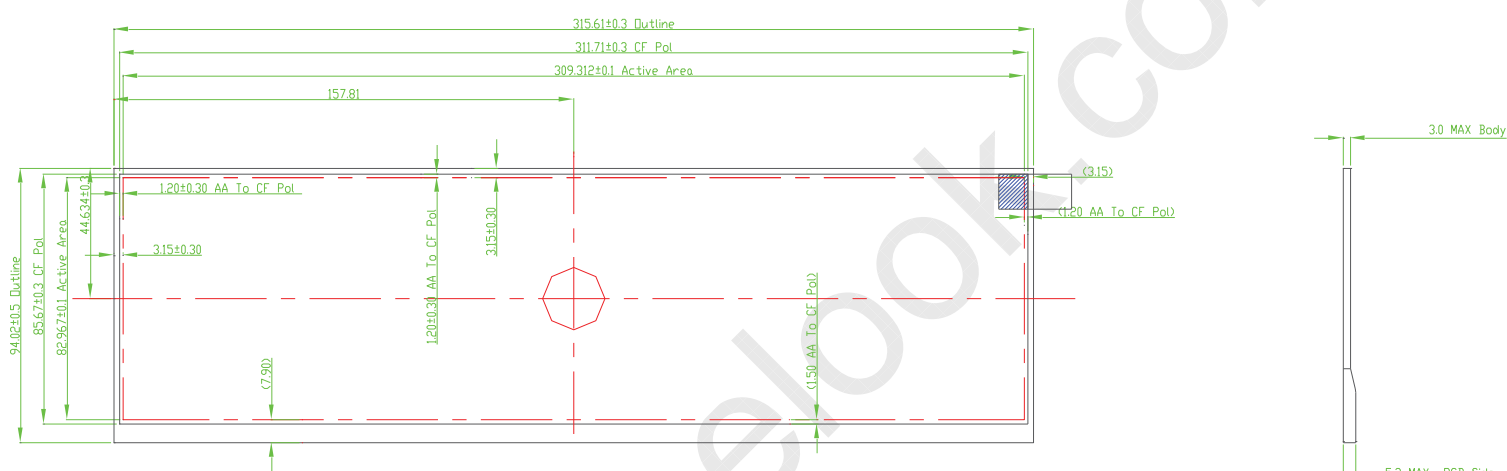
TFT-LCD Module Outline Dimension (Front View)
